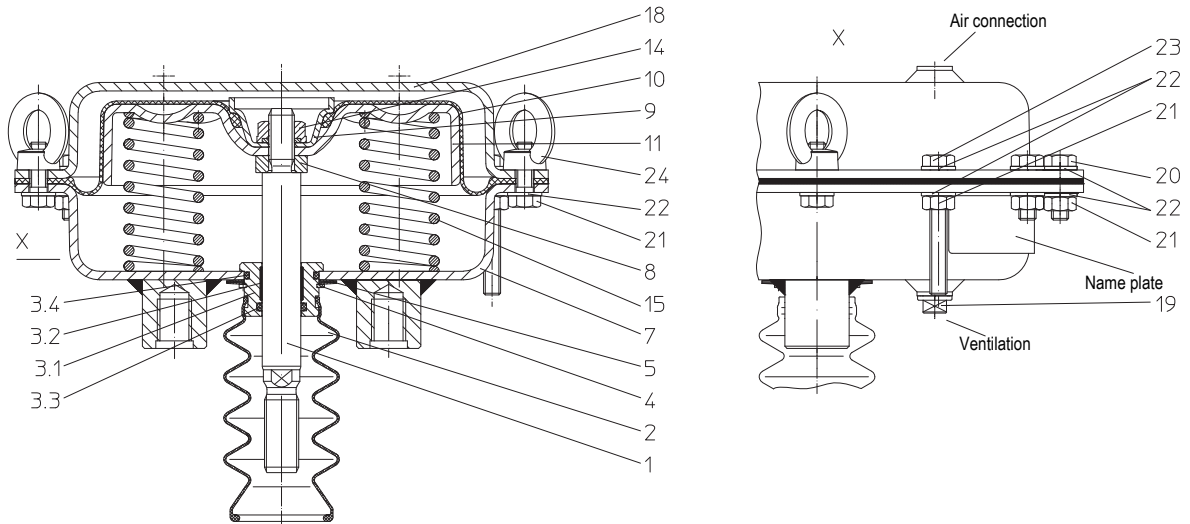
DP30 / DP32 „actuator stem retracts by spring force“
